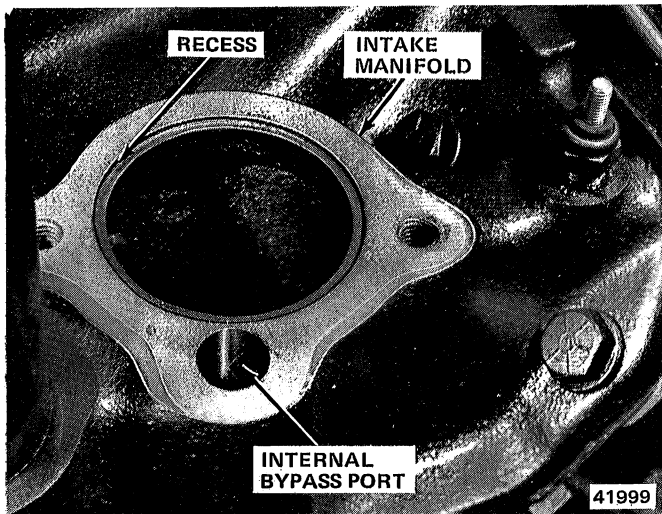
C-7 Thermostat Recess—Eight-Cylinder Engine
